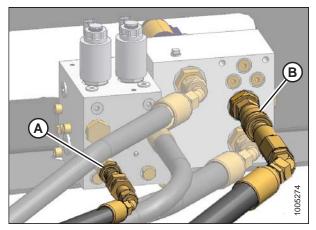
M150/M155/M155E4 without Reverser Valve A - Auger Pressure B - Reel/Auger Return
